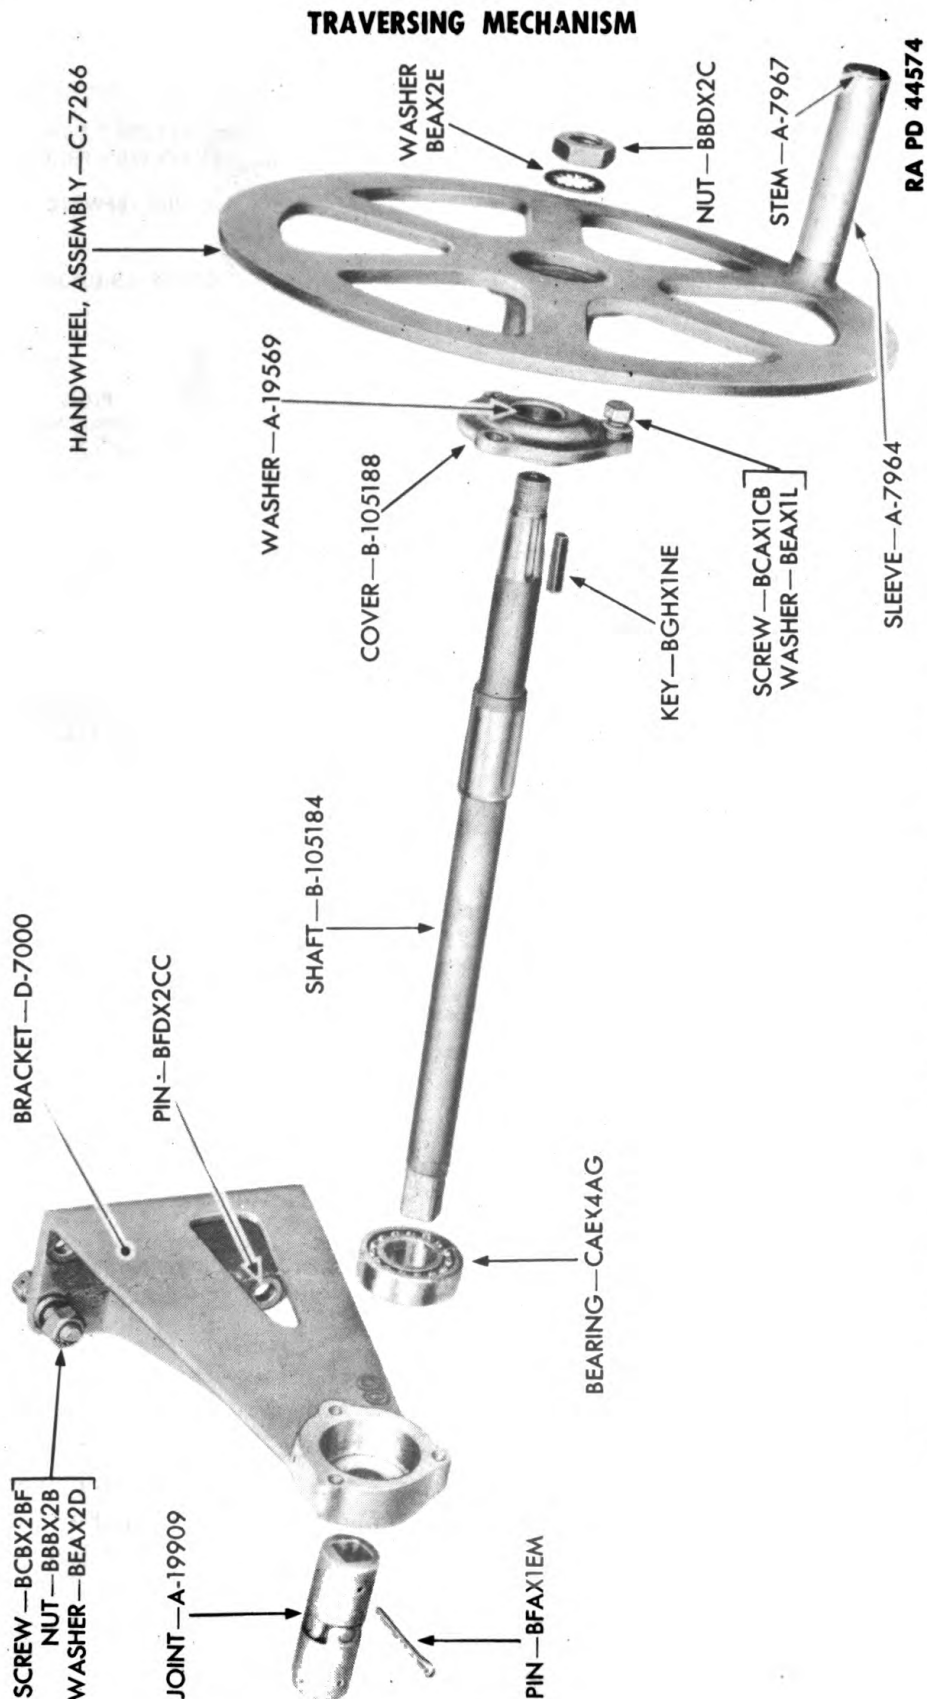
Traversing Handwheel, Bracket, and Shaft—Exploded View
